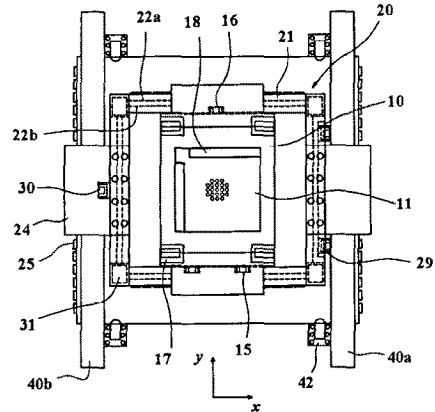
Top view of proposed stage. 11: L mirror assembly, 15, 16: air bearing along I beams for X motion, 17, 31: air bearing on granite plate, 21: window frame with I beams, 29, 30: air bearing along guides for Y motion
